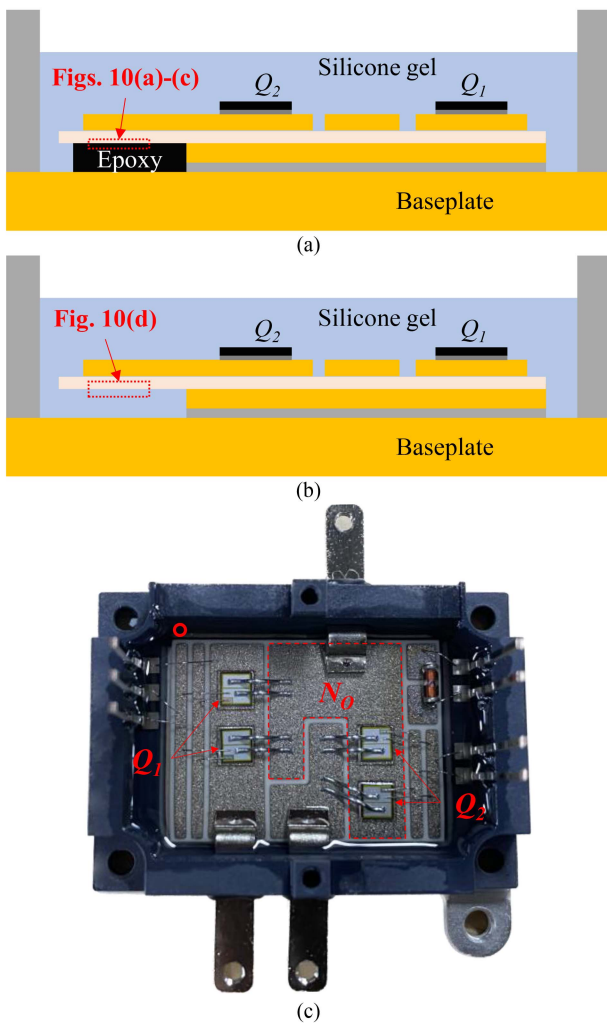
Cross section view of (a) epoxy15 and epoxy32 modules and (b) the proposed power module using silicone gel (encapsulant). (c) Photograph of the prototype power module.
